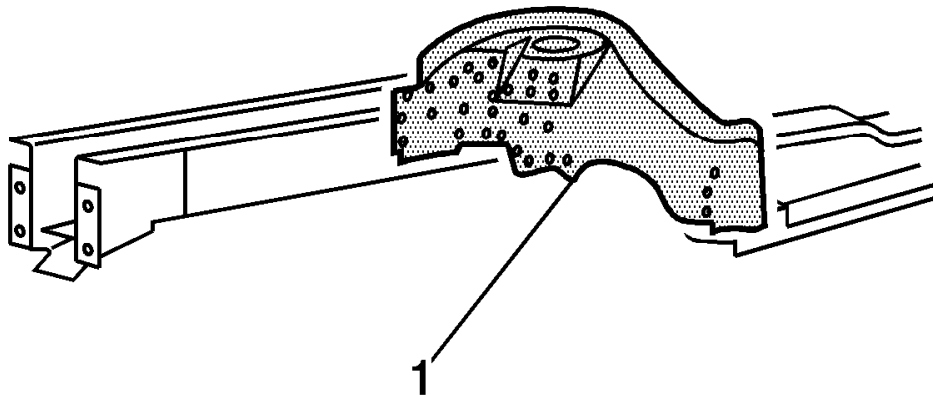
Removing Shock Reinforcement Wheel House Extension
